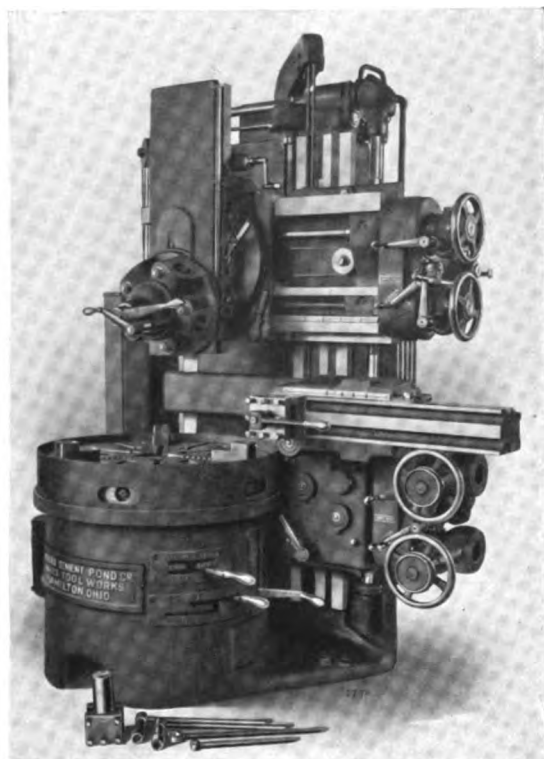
Side Head Boring 38-44" (965x1118 mm.)
